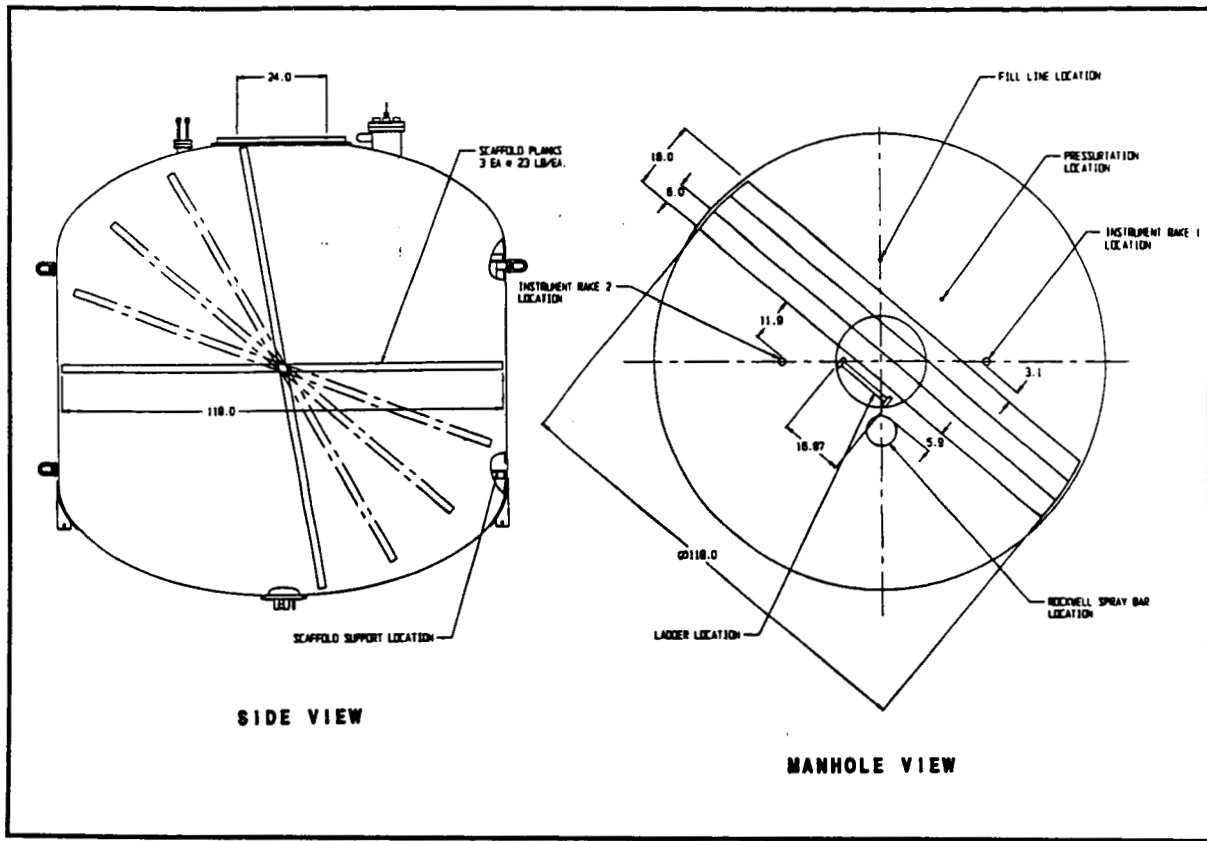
Tank Internal Support Scaffold - PDR Plans
